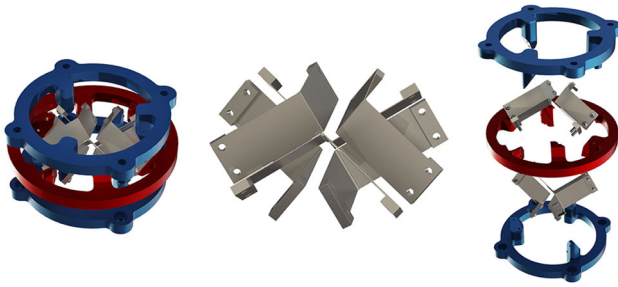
Spherical flexure joint [35]. Center figure shows the six folded sheet flexures without the frames. Right figure shows an exploded view. Design parameter details can be found in Ref. [35]
